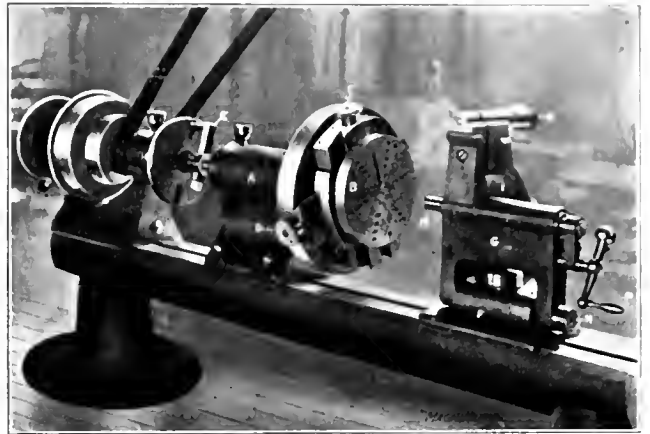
Dividing Head and Tool Rest used in Laying Out and Boring Master Plates
